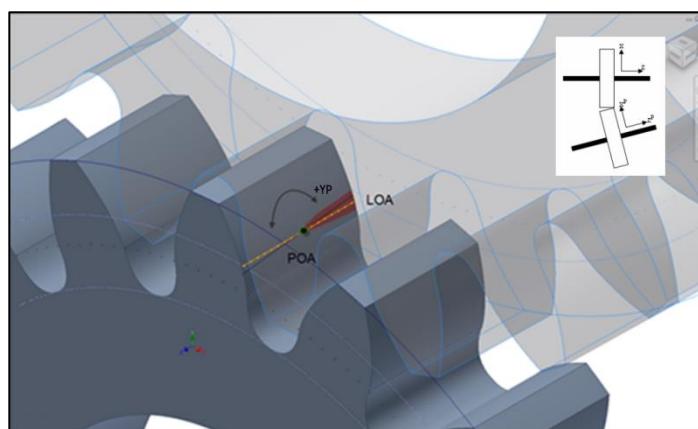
Yawing Pitch (YP) misalignments contact pinion to wheel
